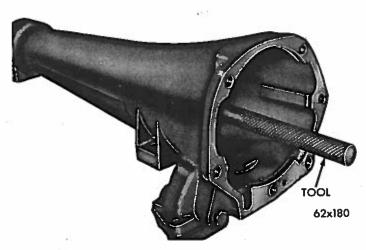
Removing Output Shaft Bearing (Tool C-3275)
